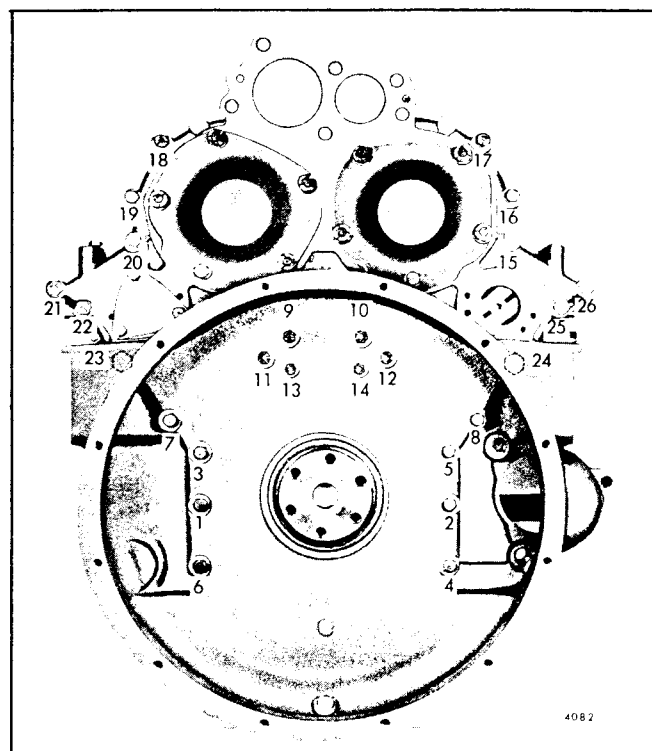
Flywheel Housing Bolt Tightening Sequence (Operation 2)--6V Engine
